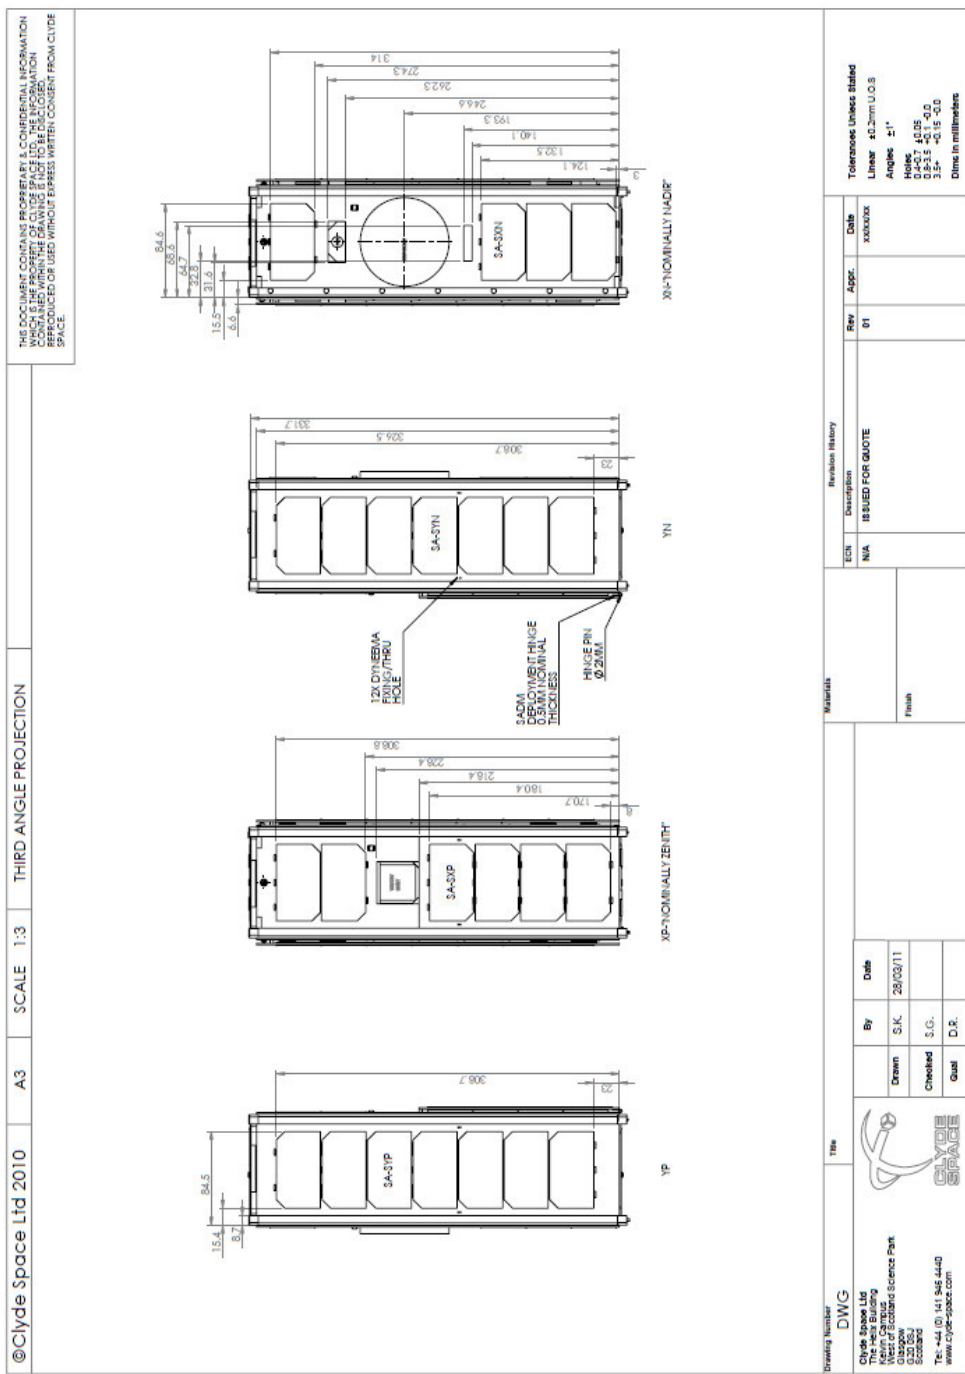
Cutaway Dimensions for Payload Boards
